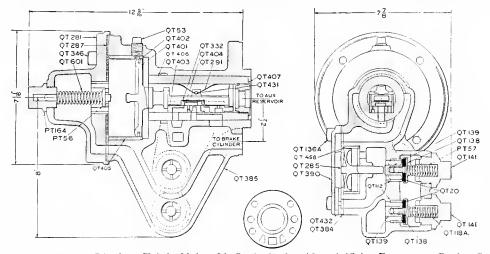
Quick Action Pipeless Triple Valve J6, Style B, for 16 and 18 in. Passenger Brake Cylinders.
